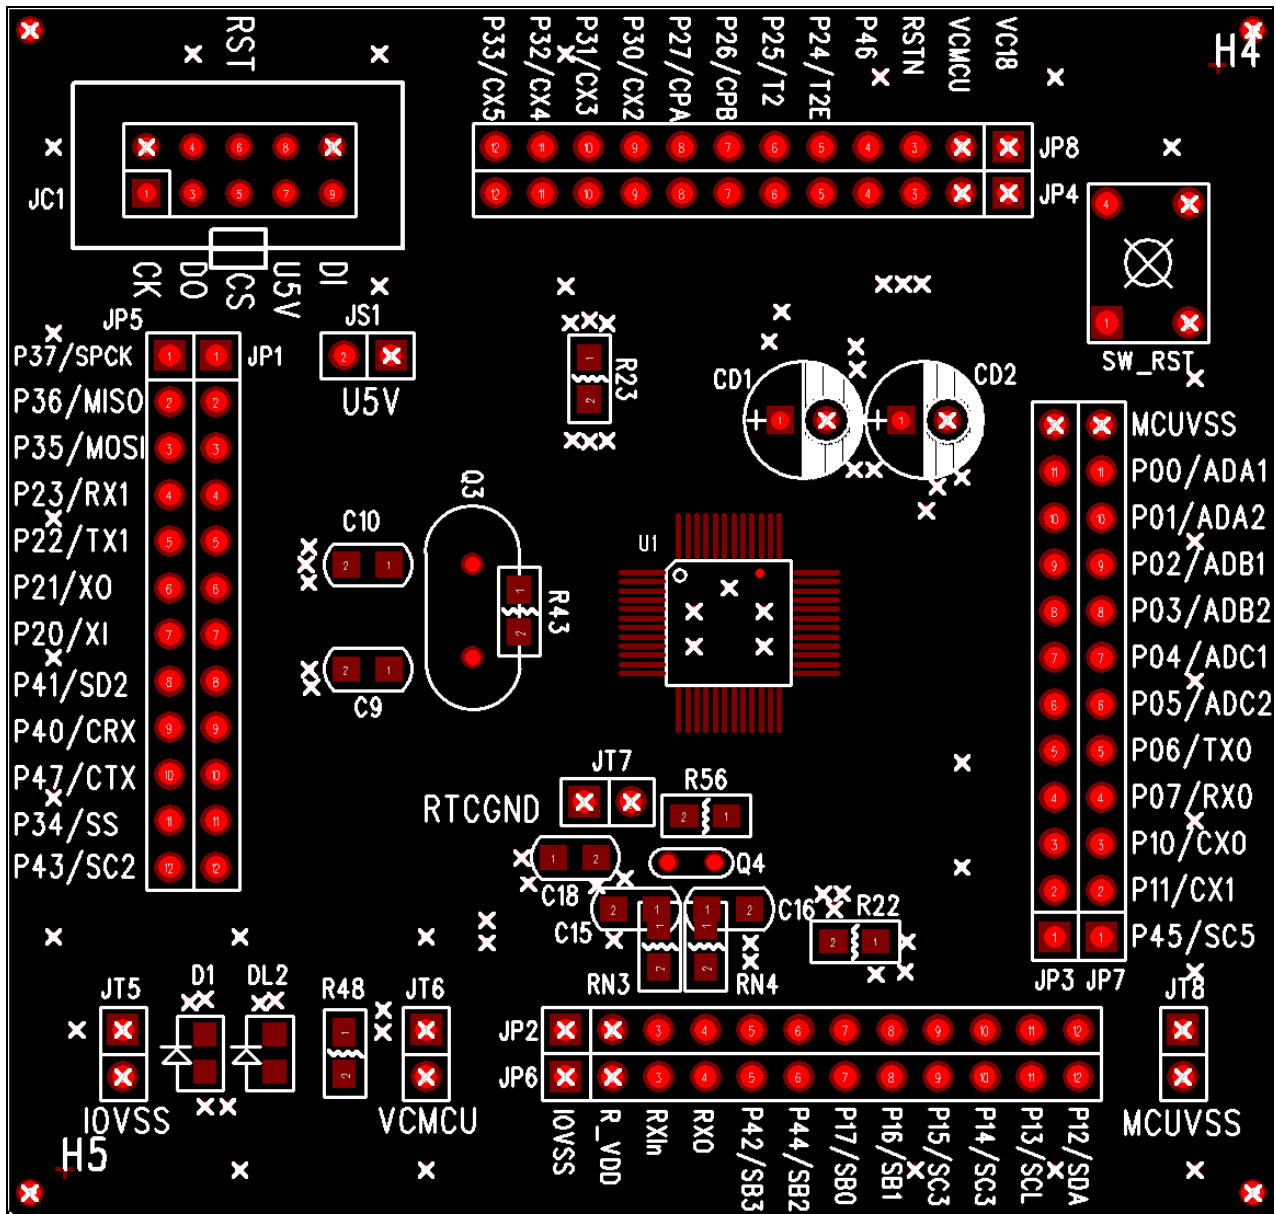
IS31CS8967A Evaluation Board Component Placement Guide - Top Layer
